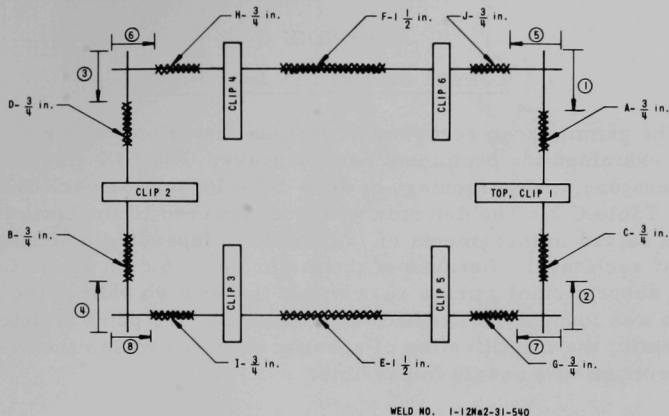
Root-pass Sequence for Welding Cutout in Elbow of IHX
